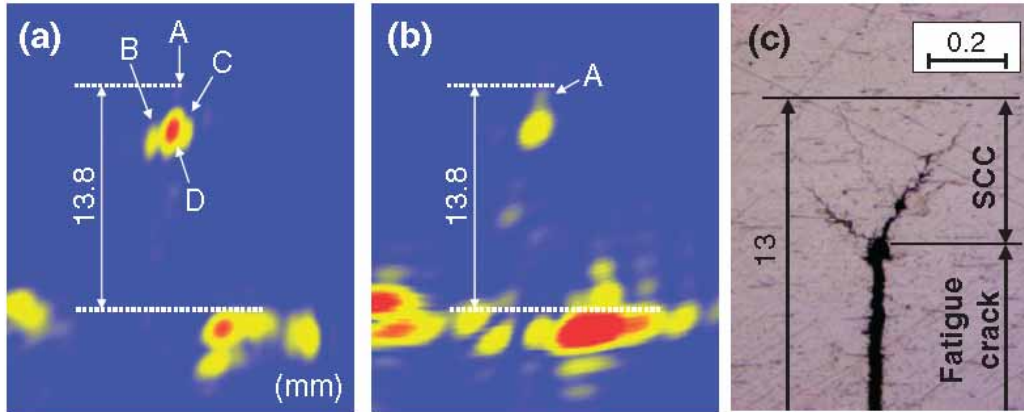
Fundamental (a) and subharmonic (b) images of stainless steel specimen 1 containing SCC cracks. (c) a picture of the etched cross-section (Ohara et al. 2008).
